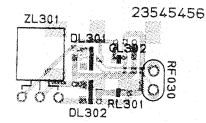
U0015 F-REM PC Board (Bottom Side)
